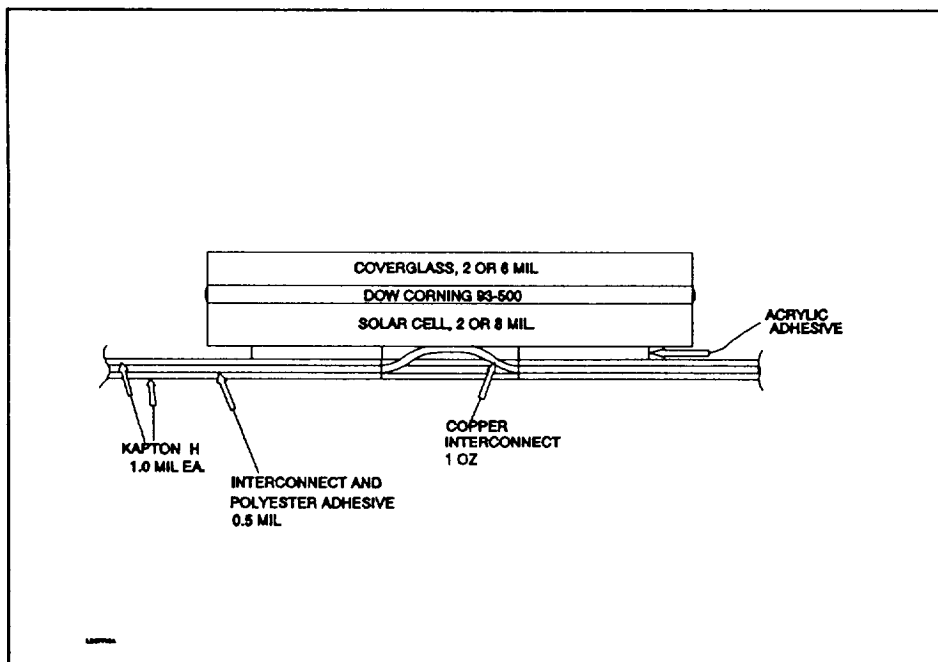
Cross-sectional sketch of MSFC SAMPLE solar cell test assemblies.
